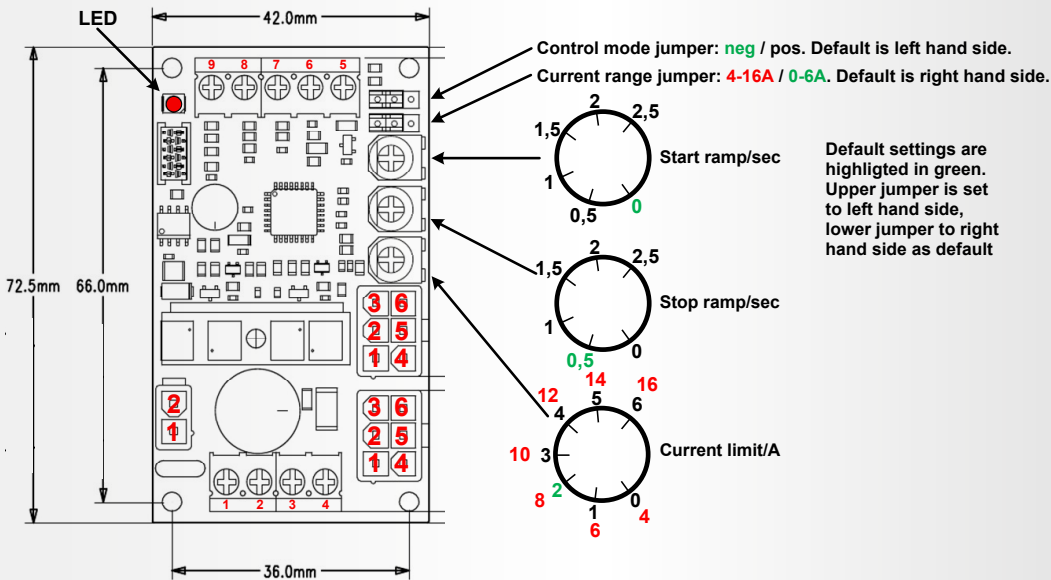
SETTINGS AND MECHANICAL DIMENSIONS
